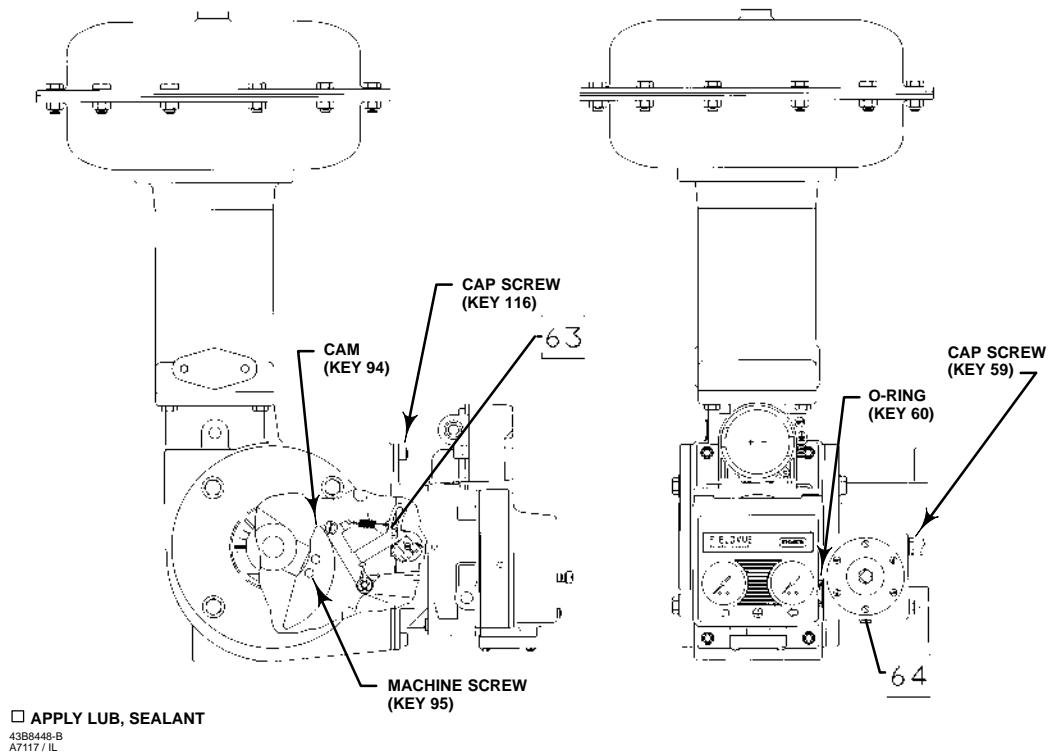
Type DVC5020 Digital Valve Controller with Integrally Mounted Filter Regulator Mounted on Type 1051 Size 40 Actuator
